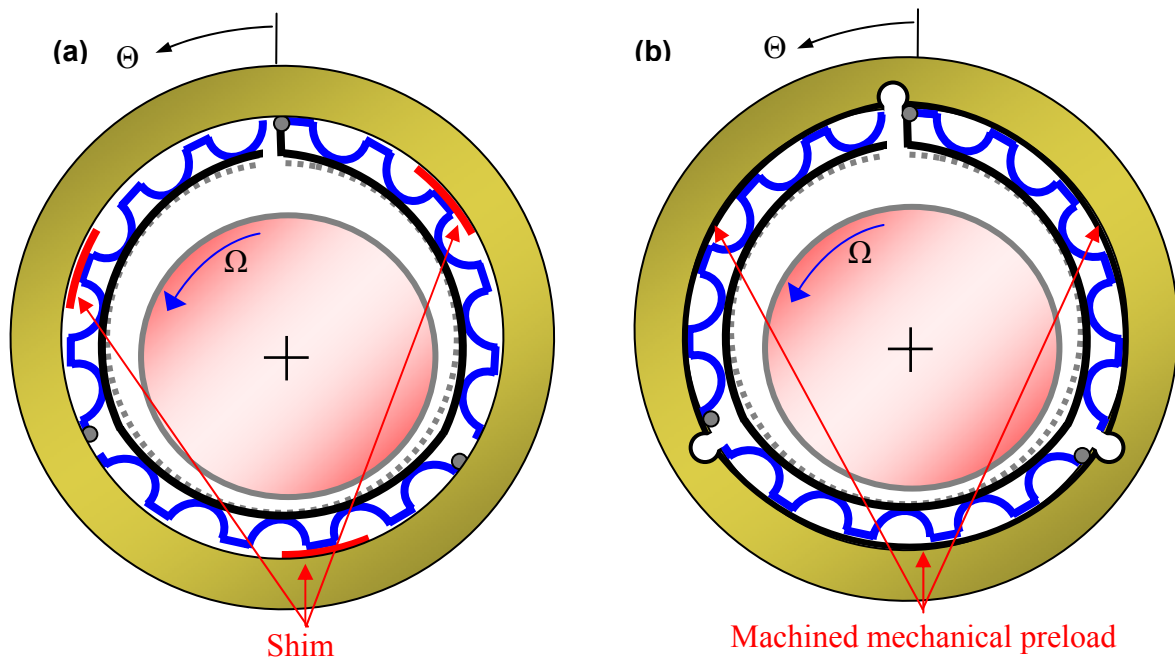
Schematic views of gas foil bearing with (a) shims and (b) with machined preloads
